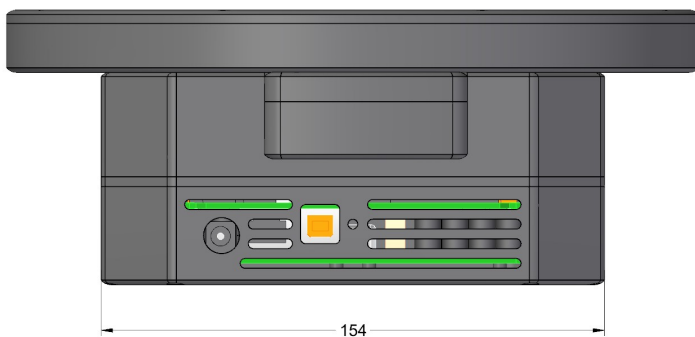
G3 camera with standard cooling and “S” size external filter wheel bottom view
